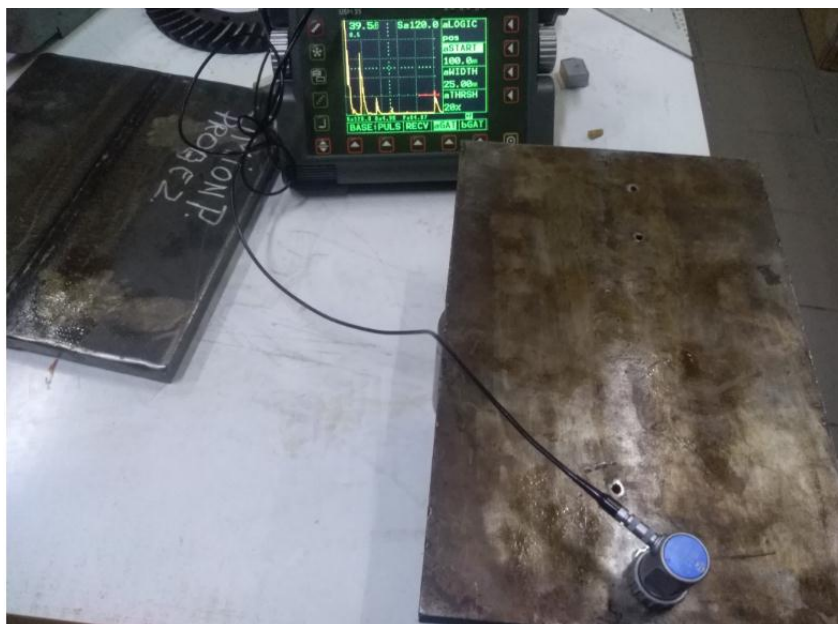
Ultrasonic examination with longitudinal waves to highlight the lack of penetration on the flange side of the fillet welded joint
